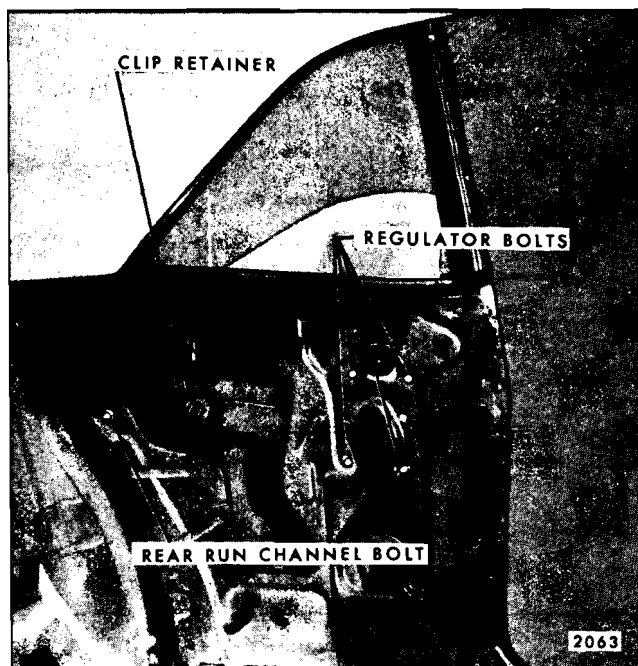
Rear Quarter Hardware Attachment - "A, B, & X" Closed Styles
